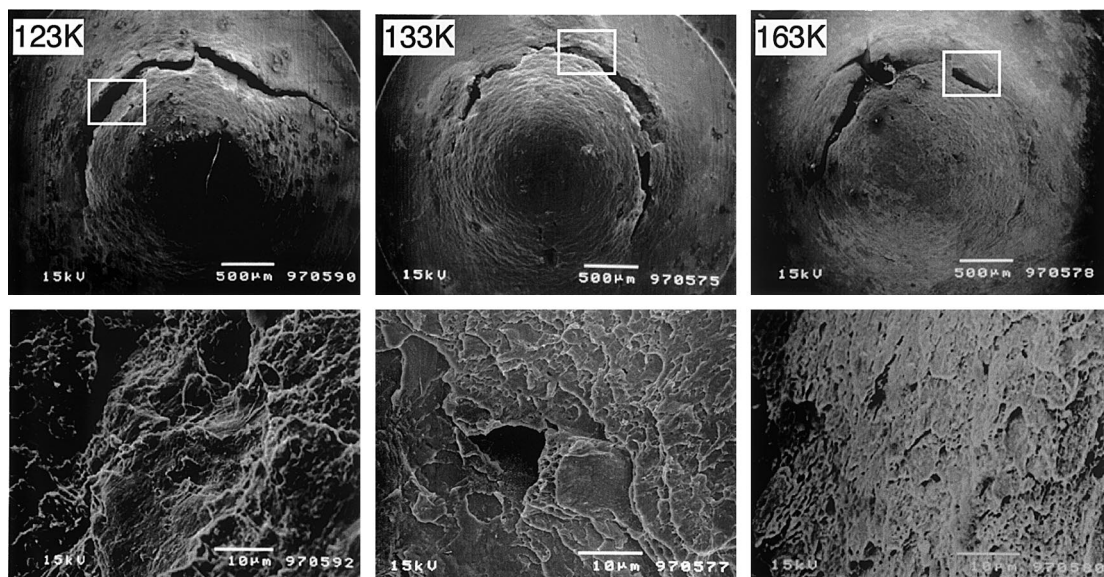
SEM images of fracture surfaces on irradiated SP test specimens.
